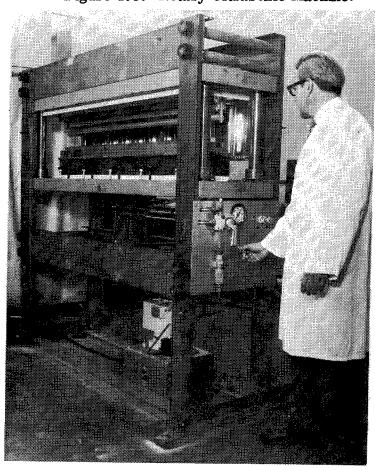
Heated Die Forming Press with Sides Removed. (Neg. 122017B)
